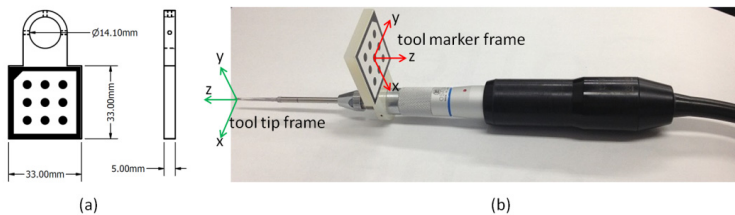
(a) Tool marker (b) Surgical instrument with the tool marker
